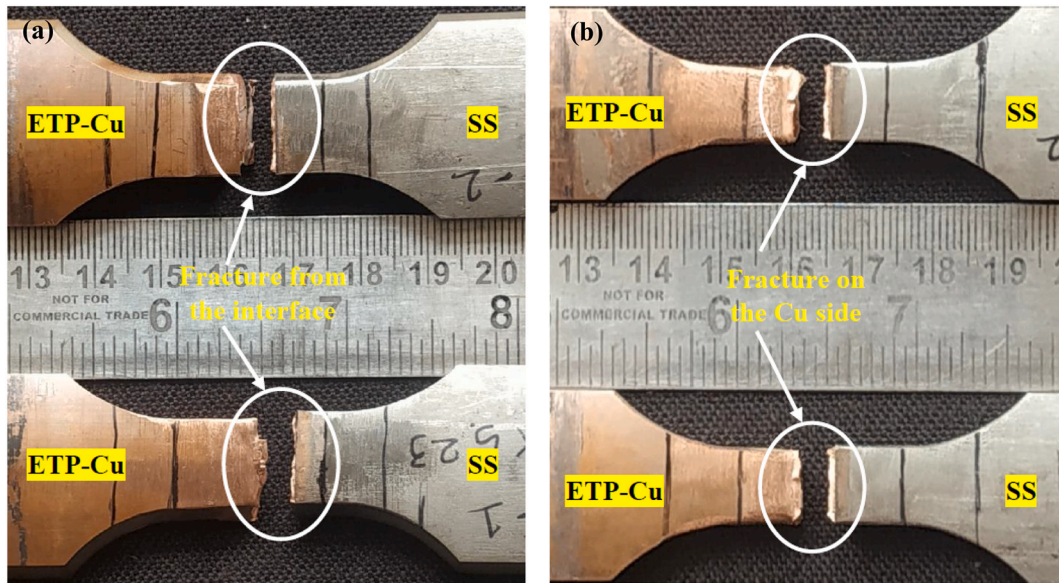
Macro images of tensile specimen after tensile testing indicating fracture locations in case, (a) sample B, (b) sample D.
